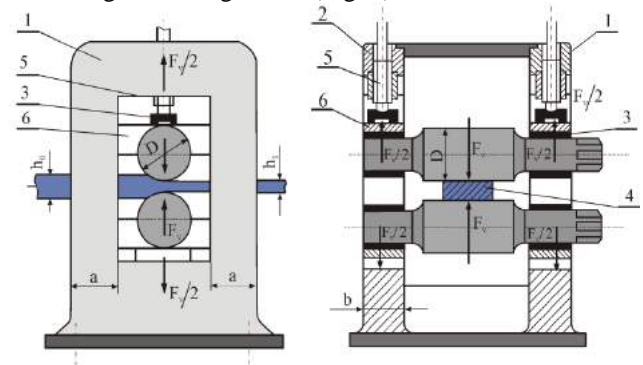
Frame of rolling machine (1,2), sensor force (3), rolled section-sheet metal (4), thread spindle (5), roller cradle (6)
